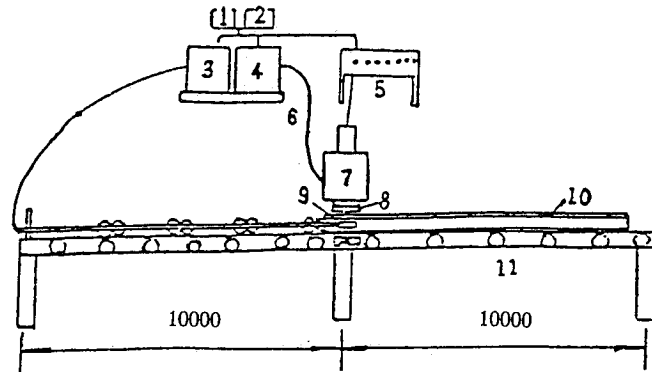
Sketch of Equipment for Oil Pipe Inner and Outer Surfaces Cleaning
